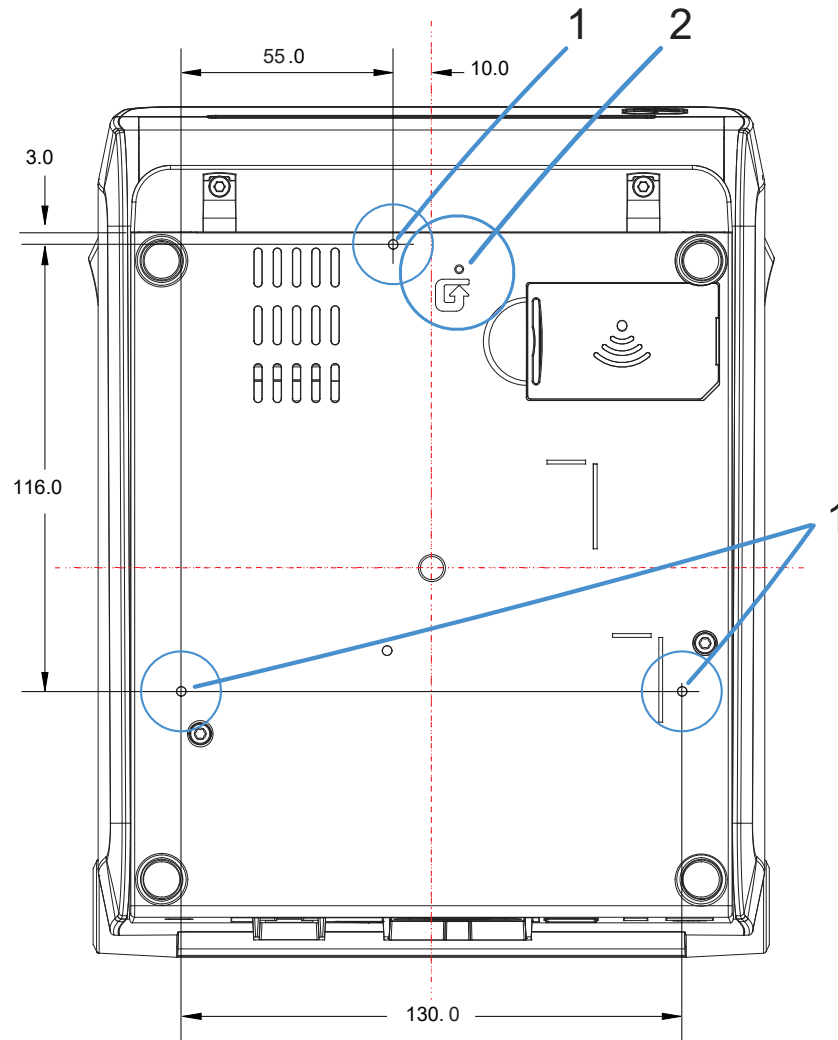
ZD621 Direct Thermal Printer (Healthcare Models Only) with Locking Media Cabinet – Dimensions
